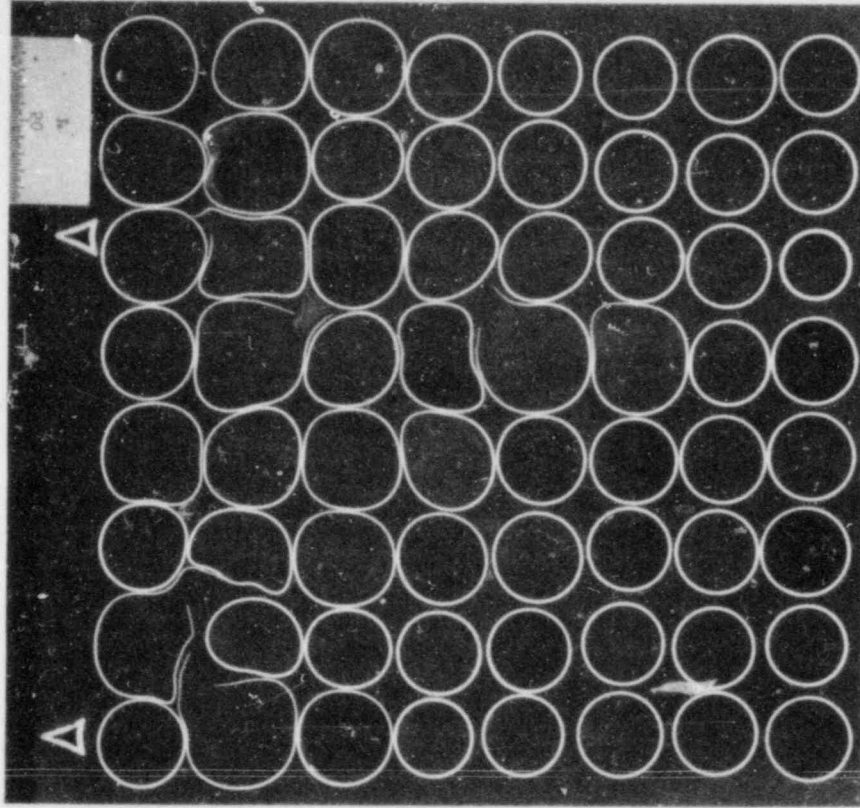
Section at 76.3-cm elevation (reversed image to show tubes in correct positions).
